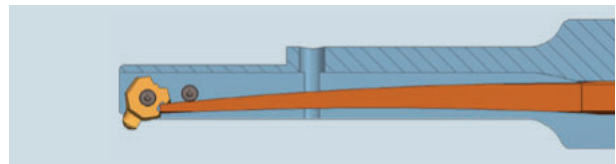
The preloaded spring and the shaft with a recess enable the tool to deburr bores with a high degree of unevenness.
